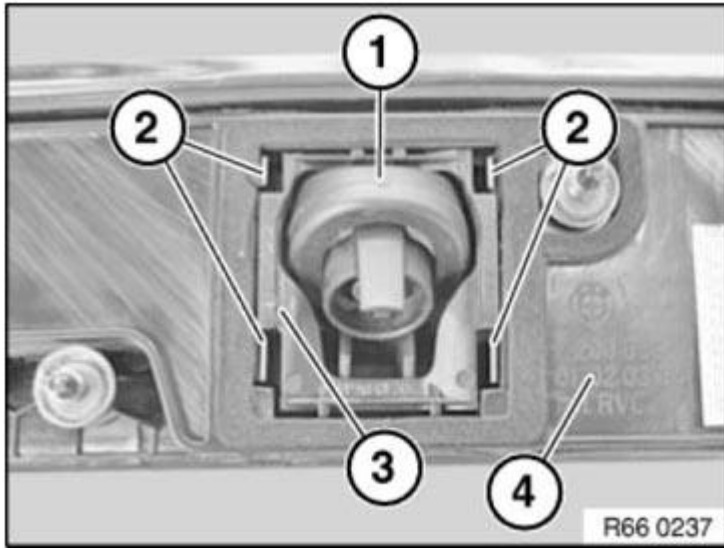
Identifying Latch Mechanisms And Lever Reversing Camera Holder Out Of Centre Tailgate Trim Strip
